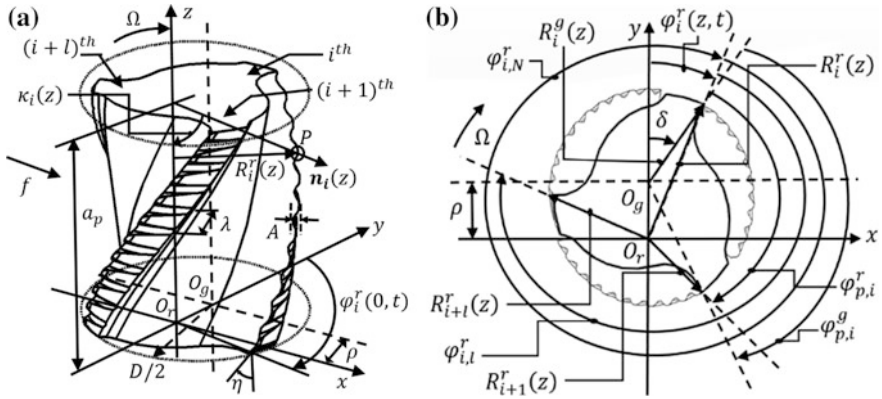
a Geometry of the serrated cutter with run-out. Figure is adapted and modified from [17]. b Cross-sectional view at height z with run-out
